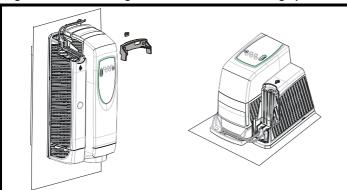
Connecting the brake resistor on a surface mounted size 2
